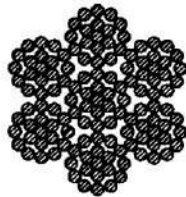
Section drawing of 7 x 19 aircraft cable
